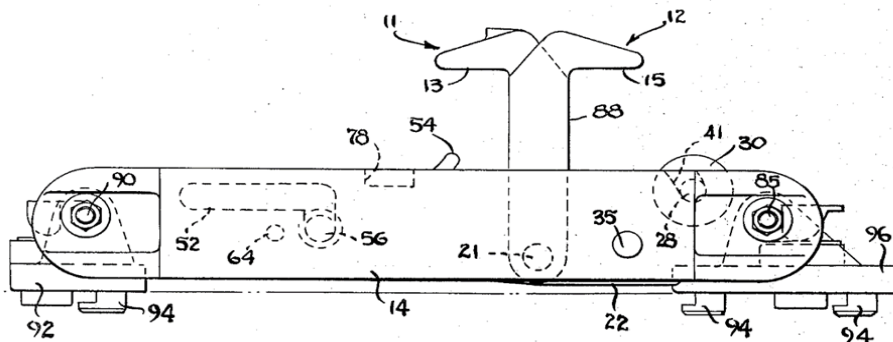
A side view of the preferred embodiment of the invention in the locked position
